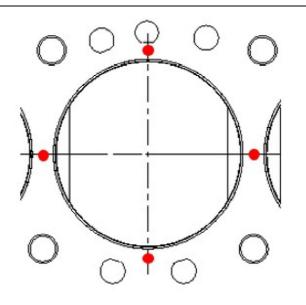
Typical example 1. Use the top face of the cylinder block to confirm the perpendicularity of the boring tool. Adjust the boring tool by measuring four points at top, bottom, left, and right side on the top face around cylinder bore. The recommended variation between four positions should be within 0.02 mm (0.0008 inch). Refer to illustration 10.
